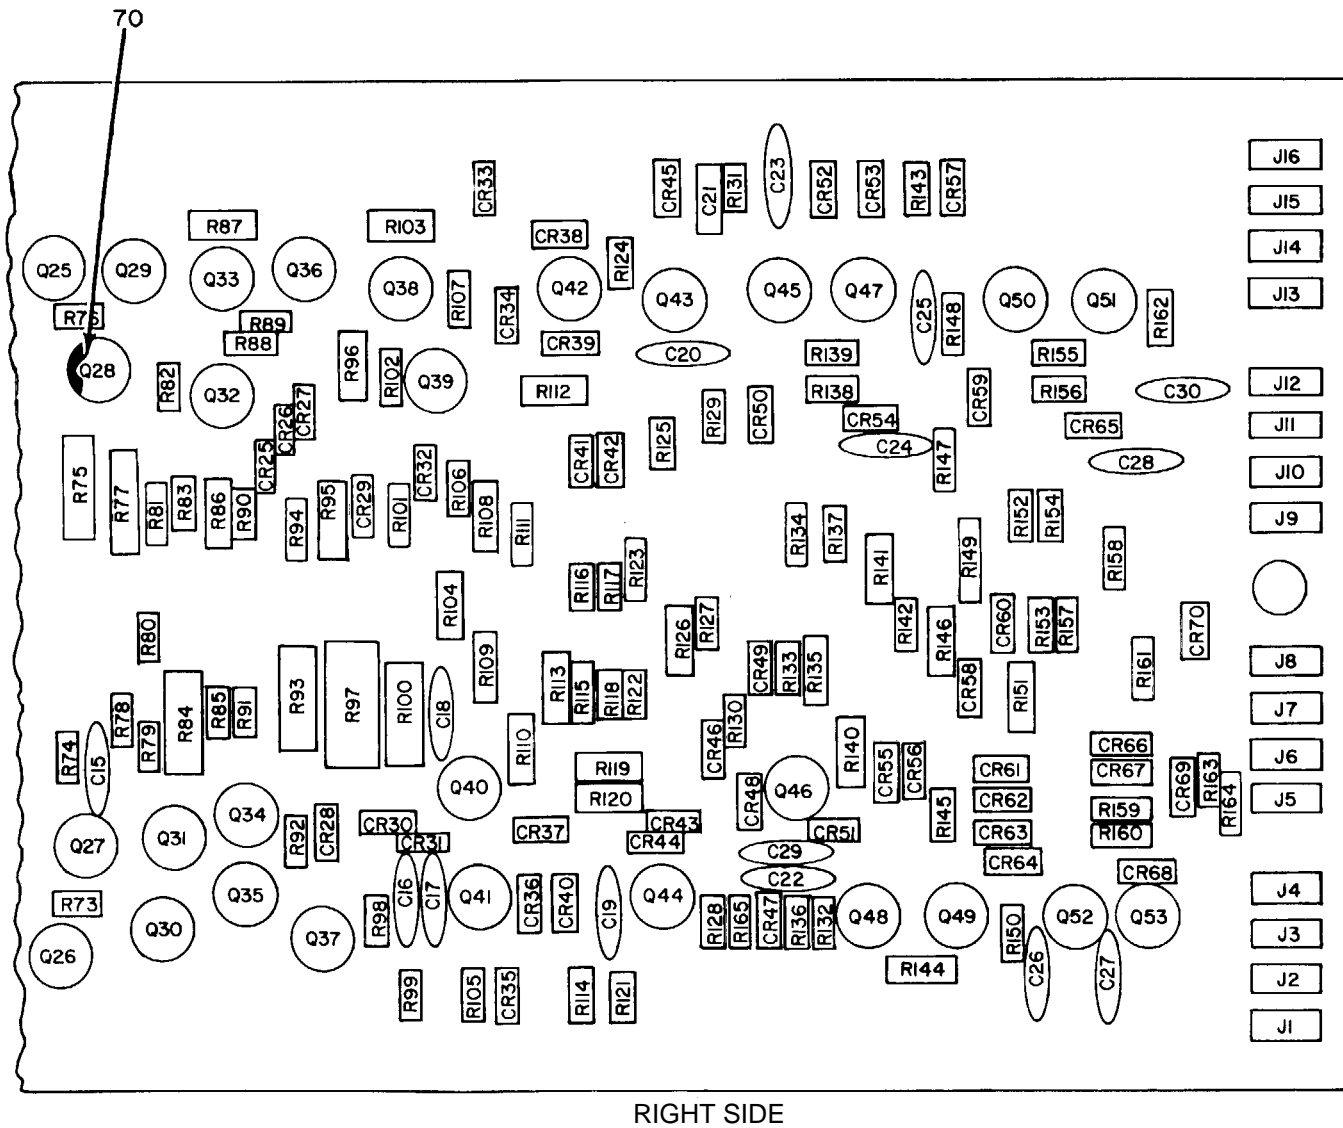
Electrical Synchronizer Subassembly PL-1119/G (Sheet 1 of 5).
